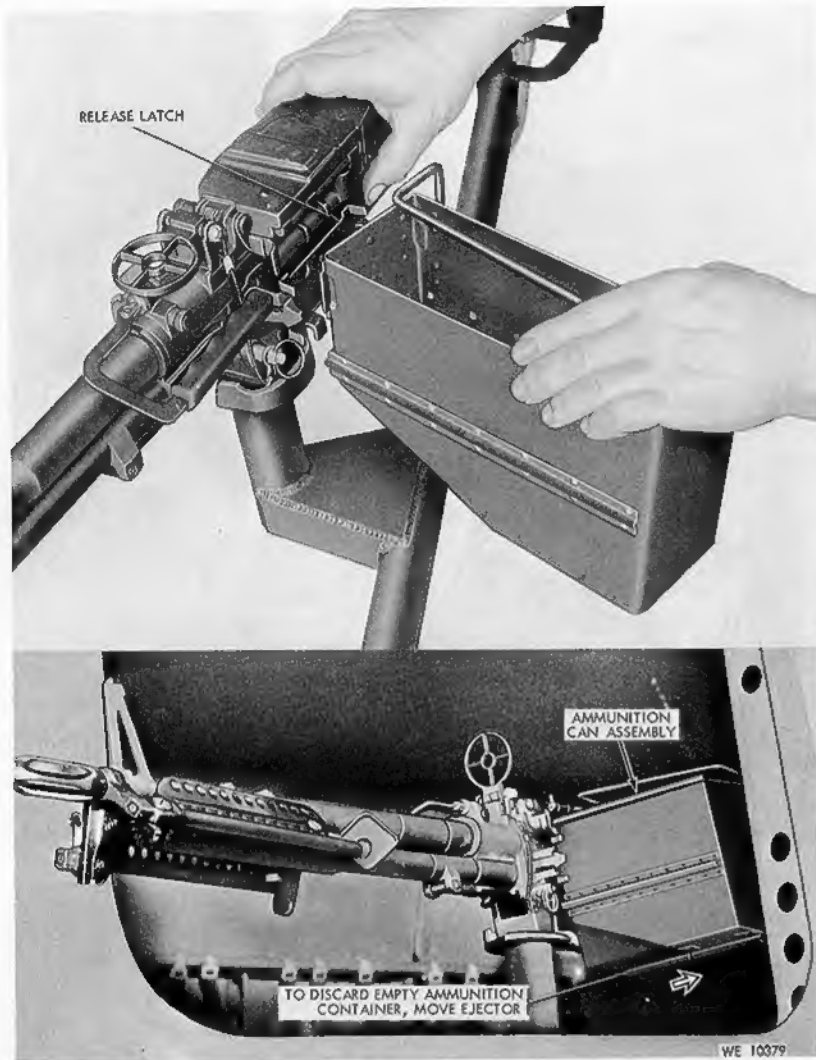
Removal or installation of ammunition can assemblies on machine gun XM60D—subsystem XM24.
